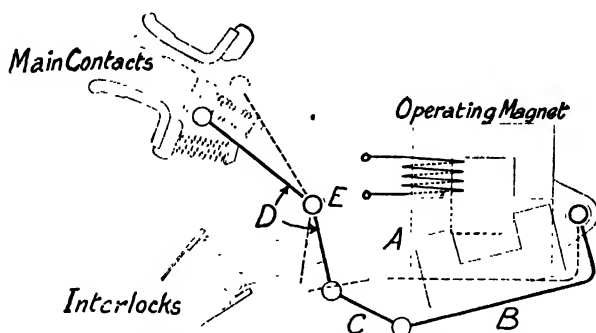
Magnet and Lever System of Siemens-Schuckert Electromagnetic Contactor. (Full lines show Contactor in open position, dotted lines show Contactor closed.)
